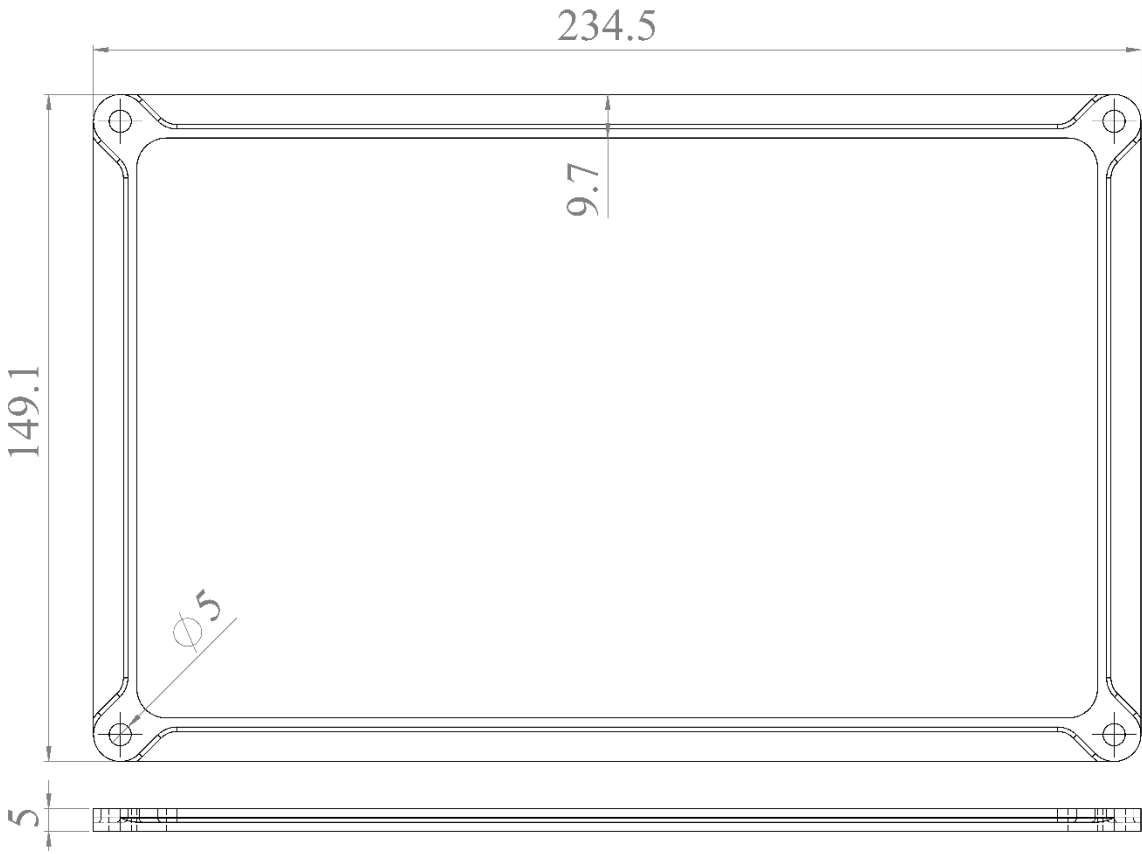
Dimensioned drawing of the back frame component, all dimensions are in mm
